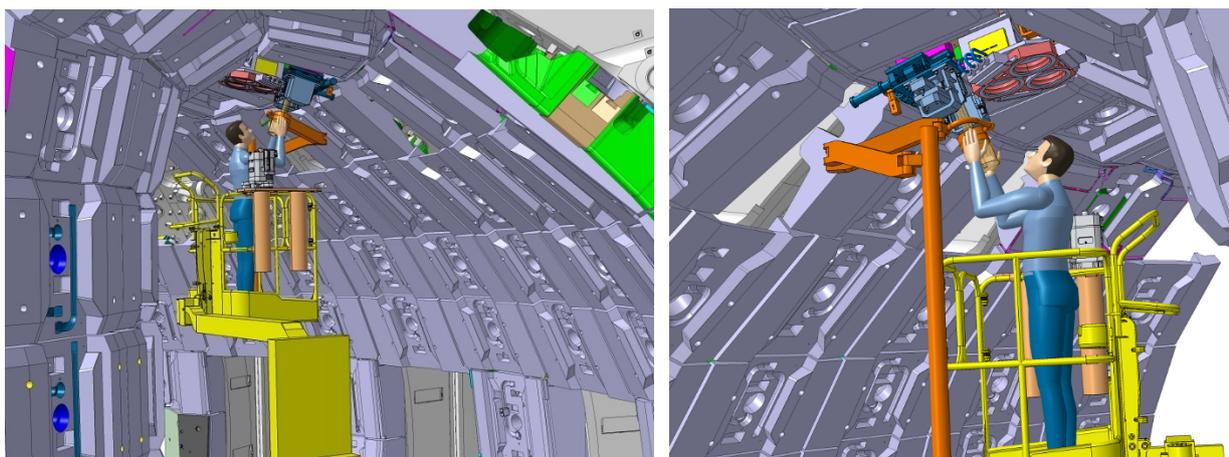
Operator installing a Tool to the SBTB located on a SB in row 9; another Tool is stored in NTS
